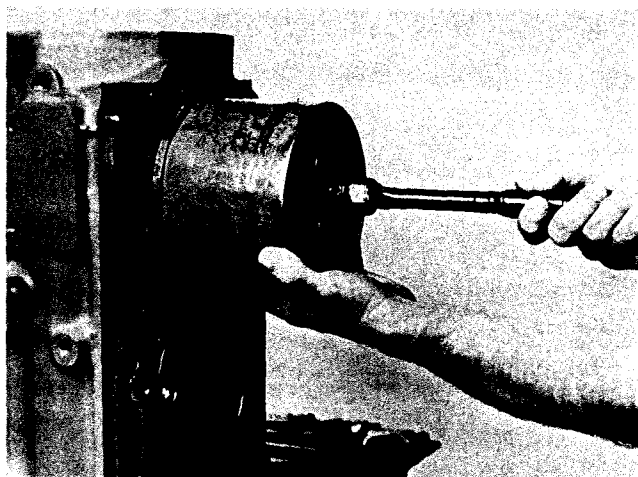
, (N114250). Installing piston and connecting rod assembly
